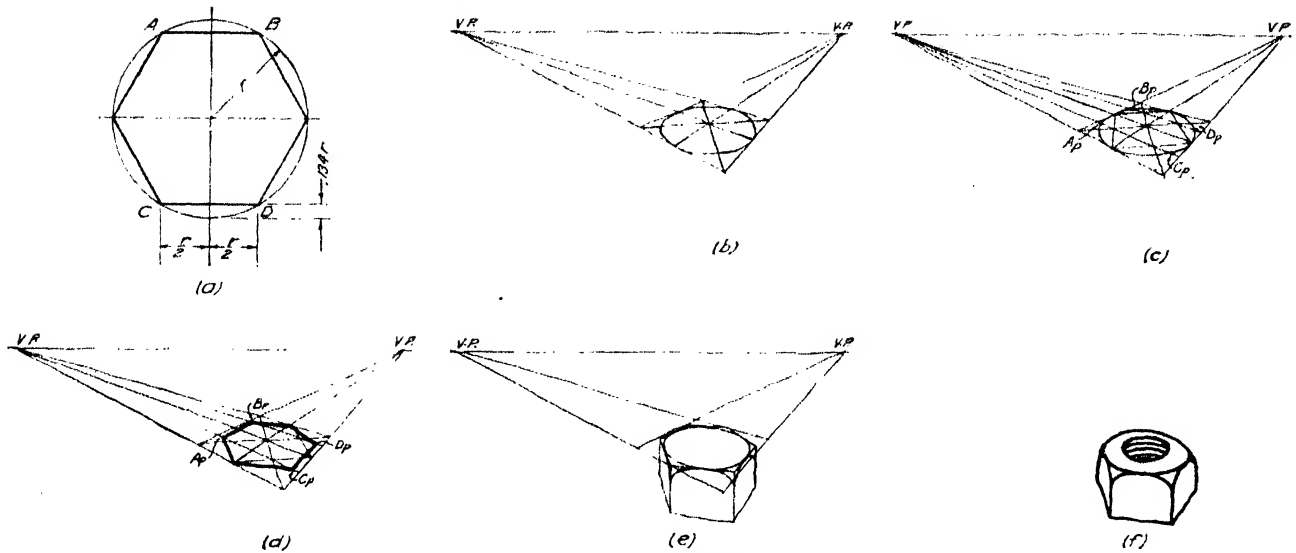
Method of sketching a hexagon and hexagonal nut.
